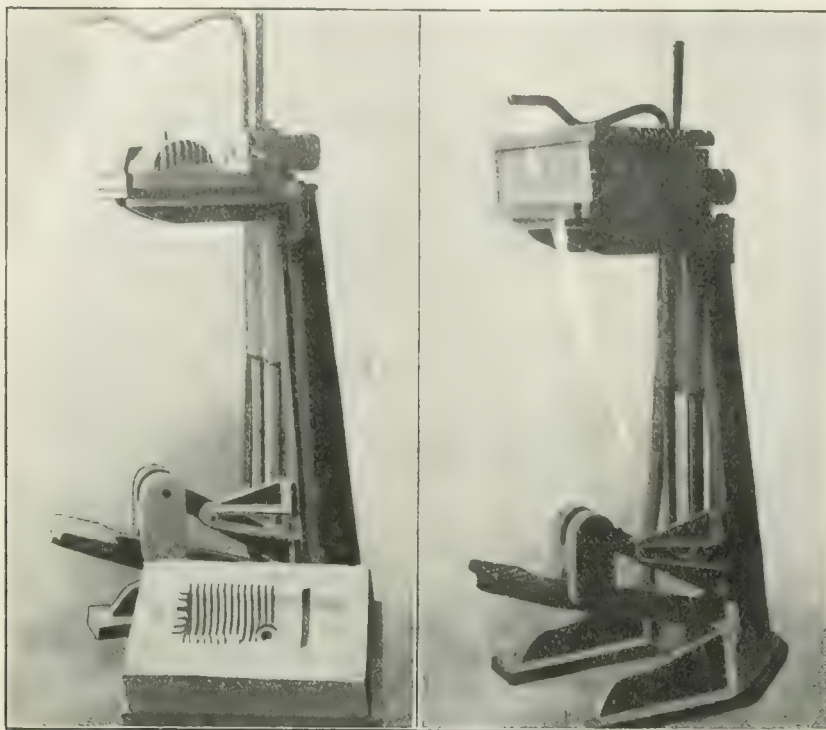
Core Machine with Pattern. Fig. 2.—Core Box Clamped Following Ramming.
